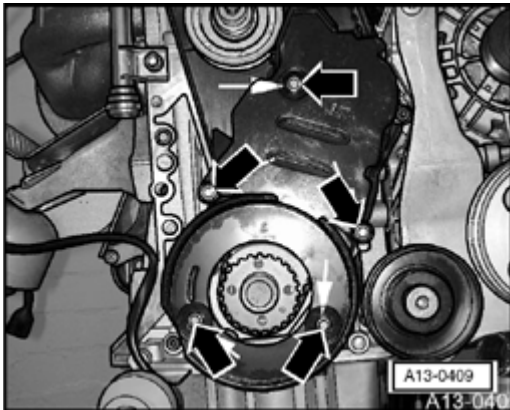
Removing Center And Lower Part Of Drive Belt Cover
